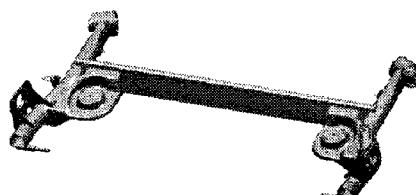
Beam type CTBA with the stamping process of a single thick sheet metal
